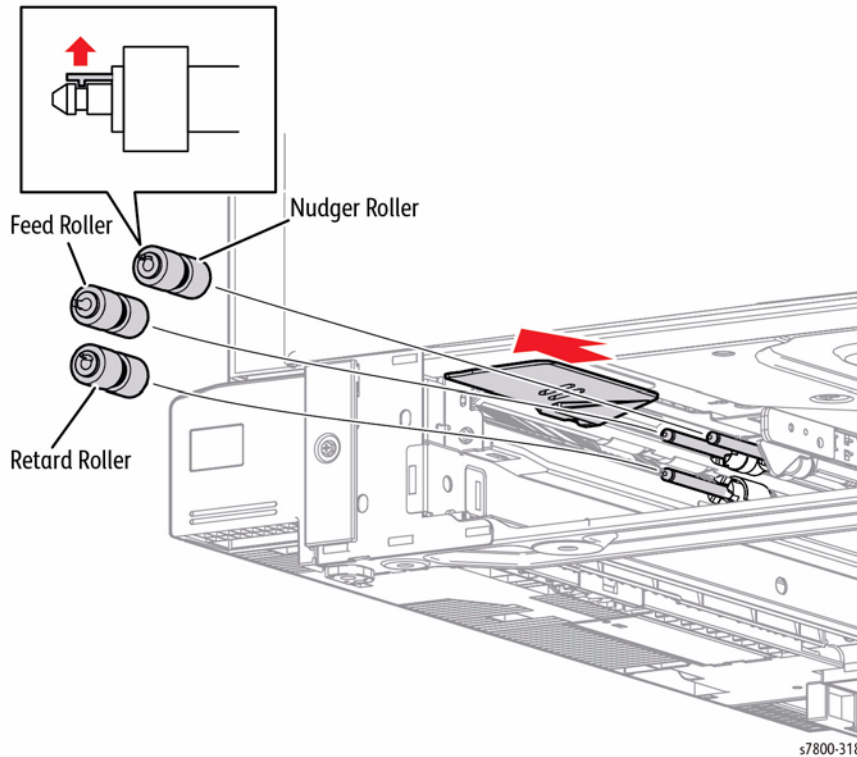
Removing the Tray 2 Feed Roll/ Nudger Roll/ Retard Roll
